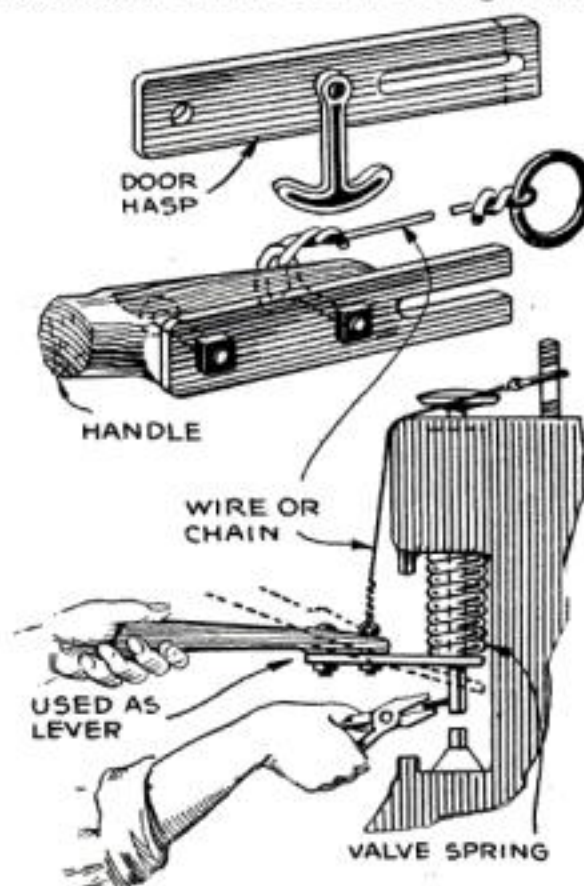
Easy to make a valve lifter at home with hammer handle, bolts, ring, and bit of wire.
